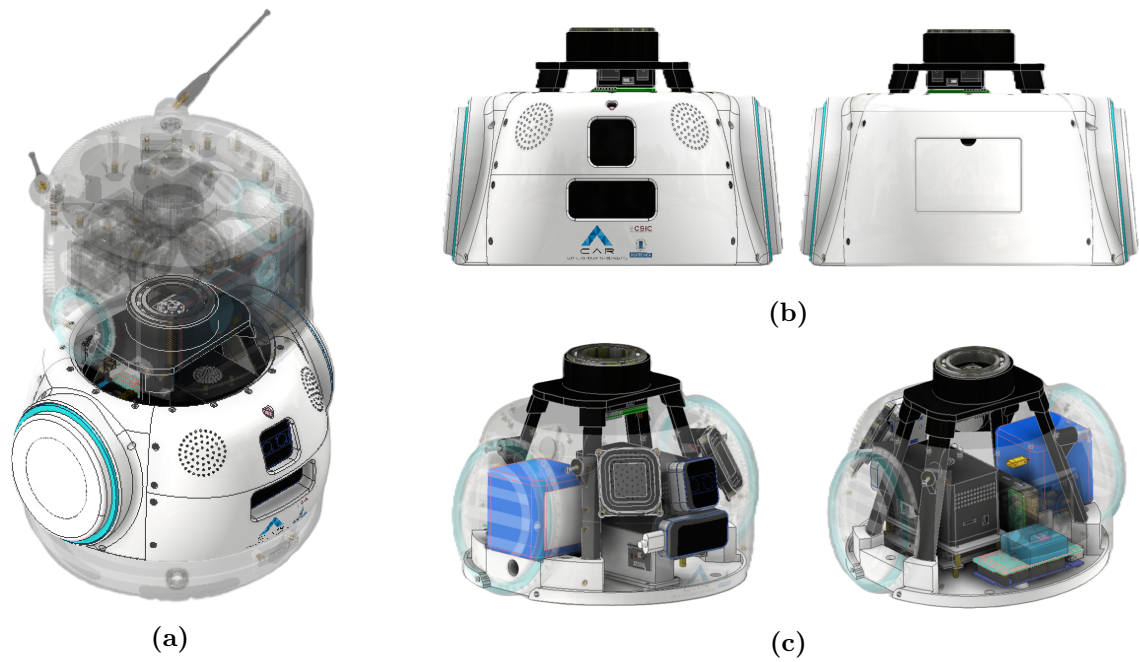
Robot body sub-assembly: (a) Location in the main assembly, (b) External front and back views, (c) Internal detail views.
